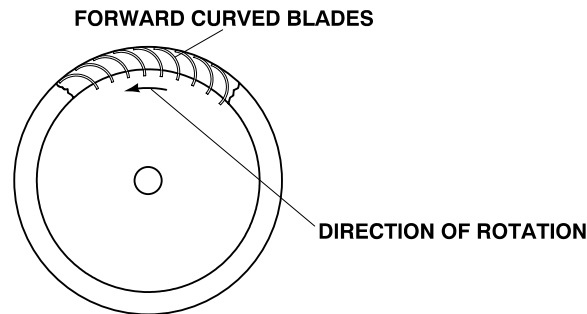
FAN IMPELLER DIRECTION OF ROTATION.
